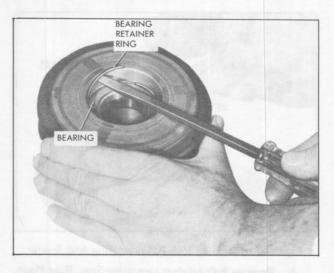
Removing Pulley and Bearing Retainer Ring
